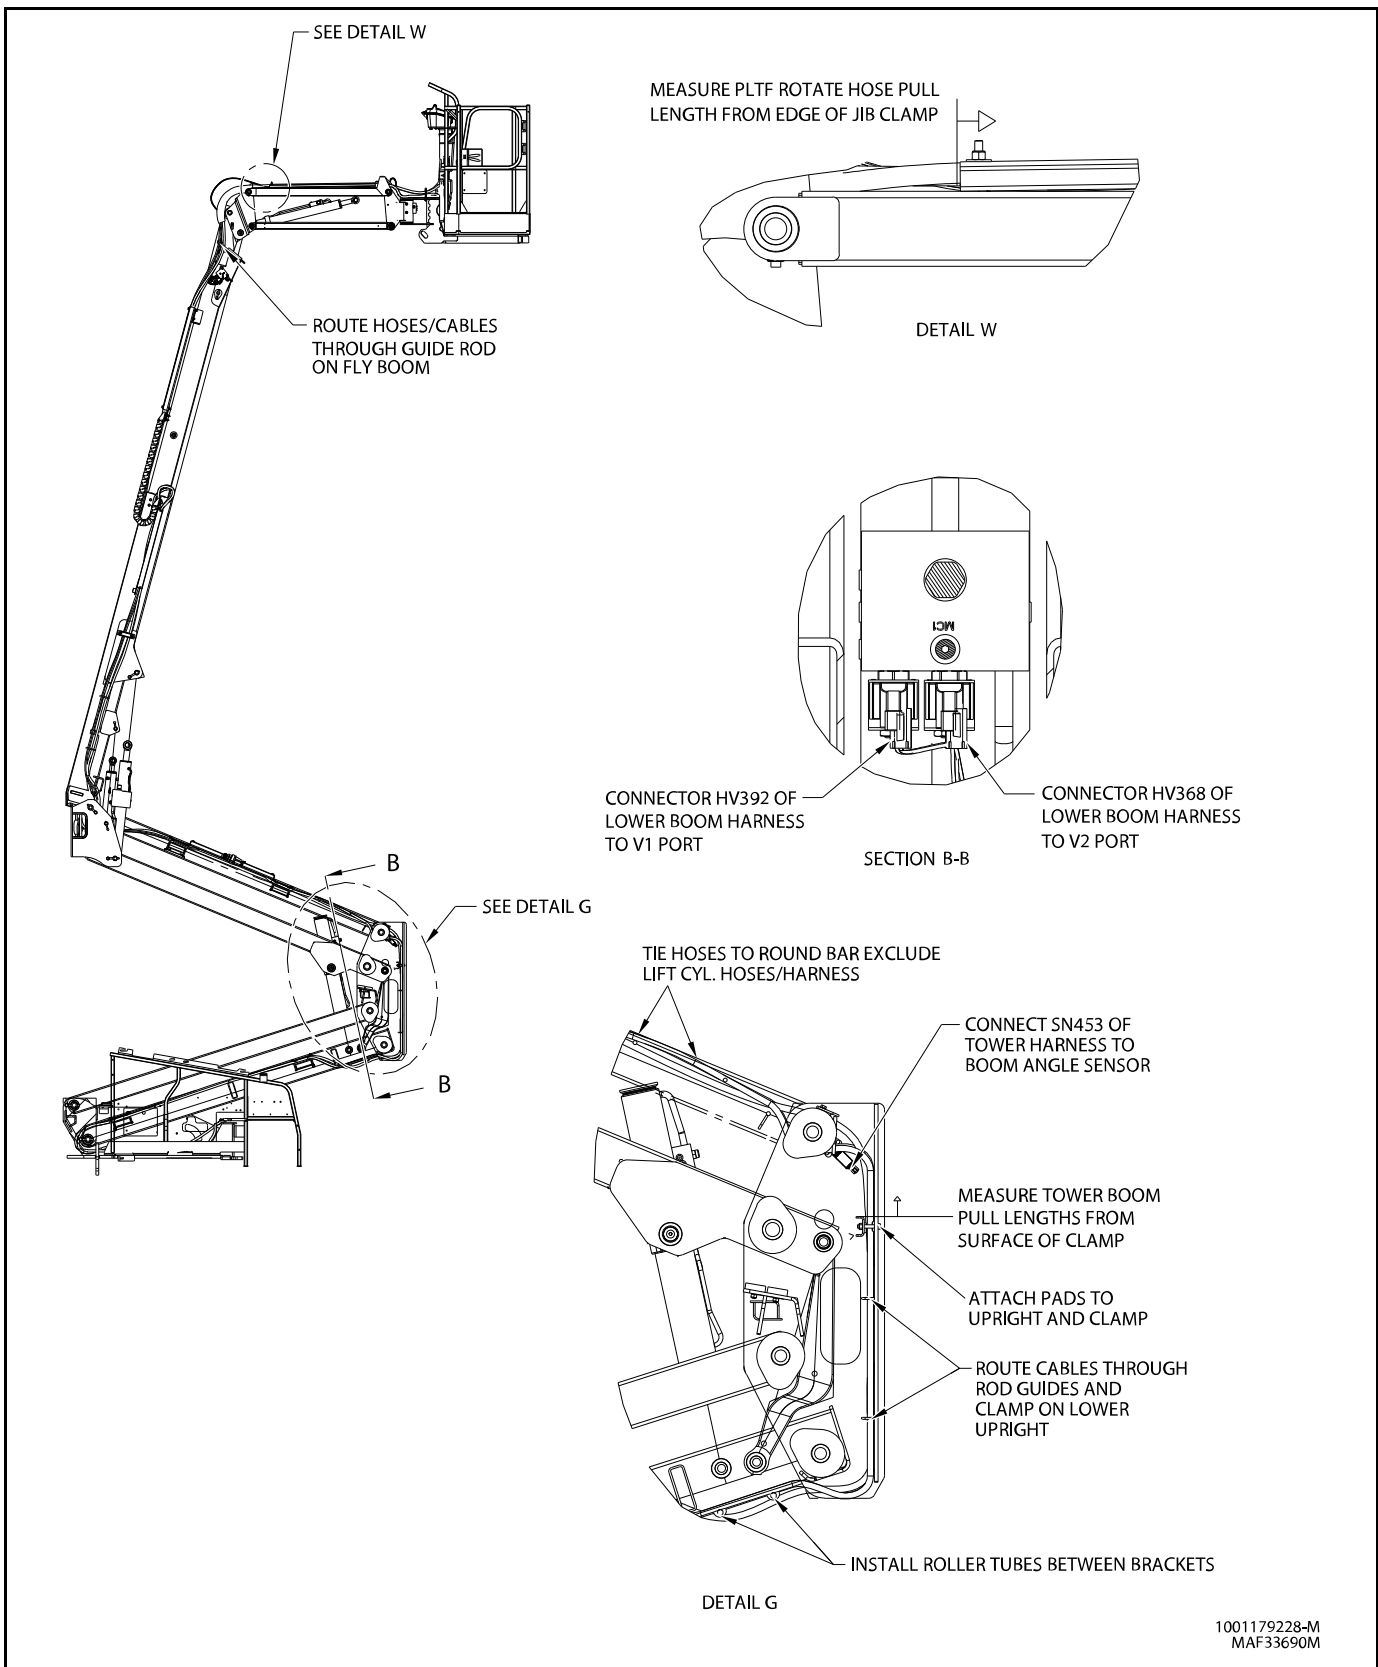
Cables and Clamps Installation - Sheet 2 of 8
